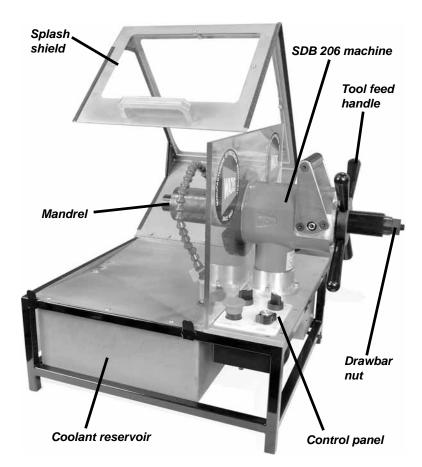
The photo illustrates the components of the weld coupon station.
